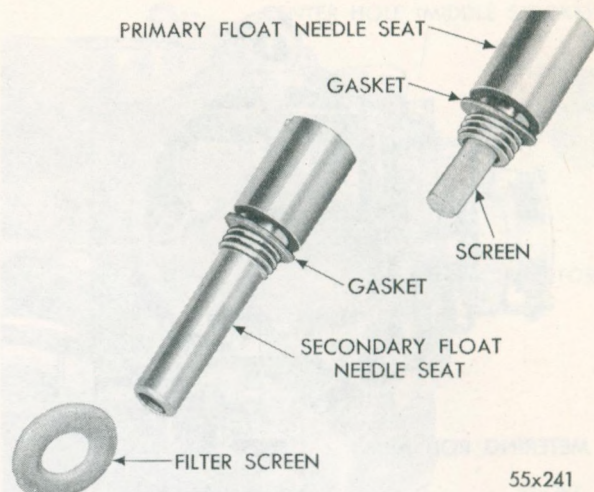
Primary and Secondary Float Needle Seats and Screws
